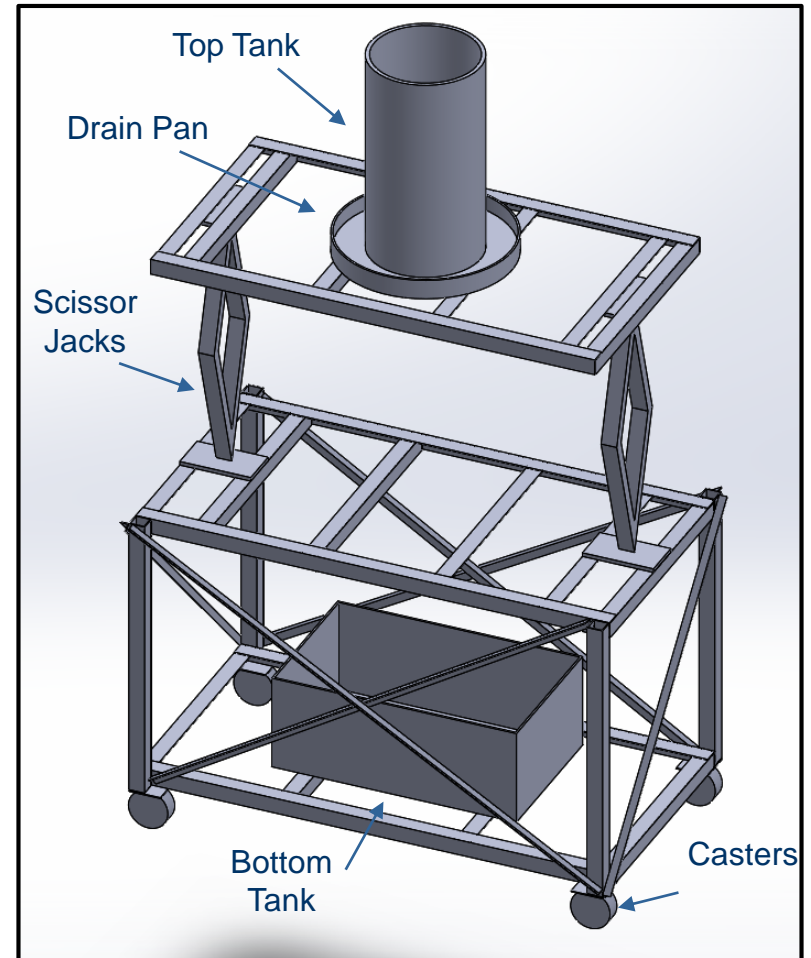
3D Aerial View of Structure Design using SOLIDWORKS
